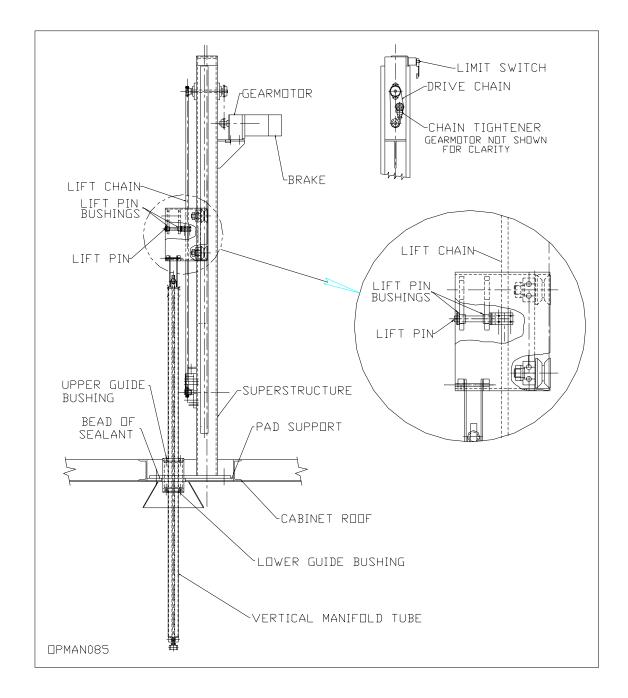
8: Center Manifold Mechanism and Superstructure
